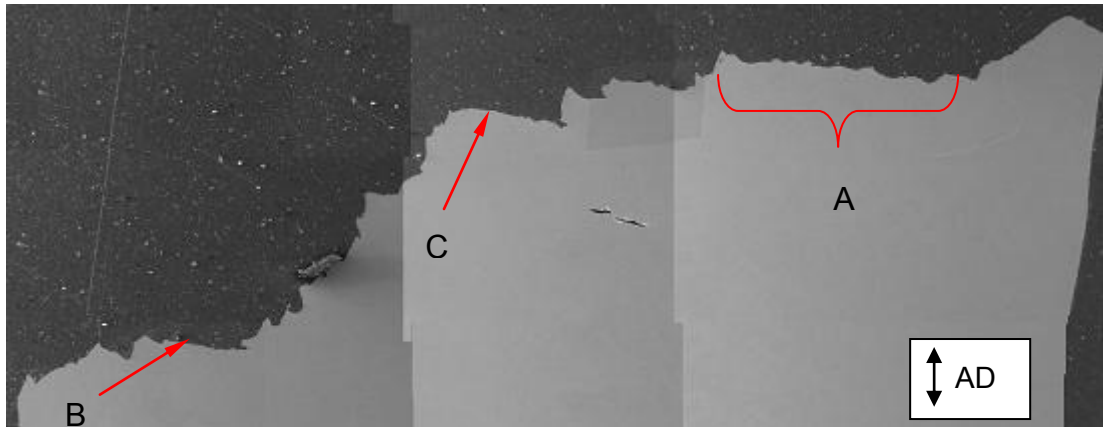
Ti829 dwell LCF test specimen fracture surface cross-section
